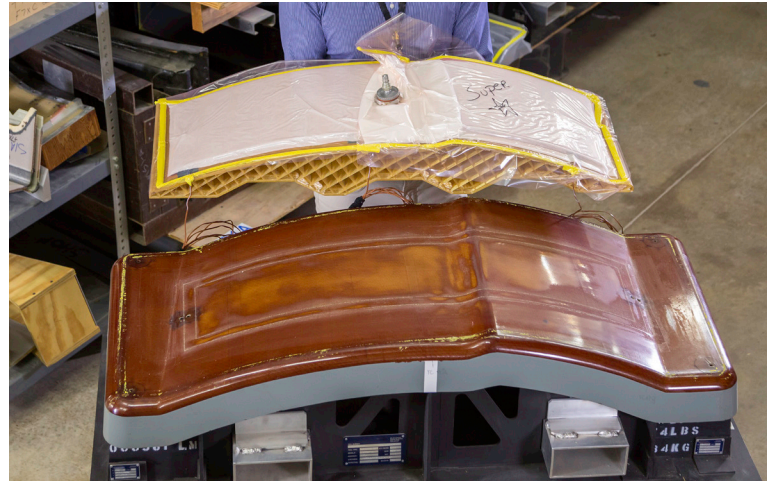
Medicine cabinet lay-up molds. FDM tool (top). Traditional FRP tool (bottom).
